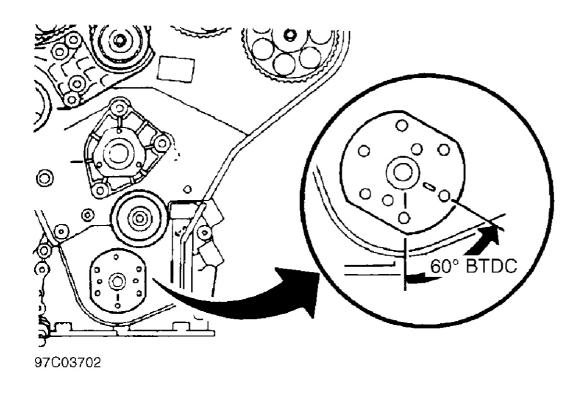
Positioning Crankshaft At 60 Degrees BTDC Courtesy of GENERAL MOTORS CORP.
